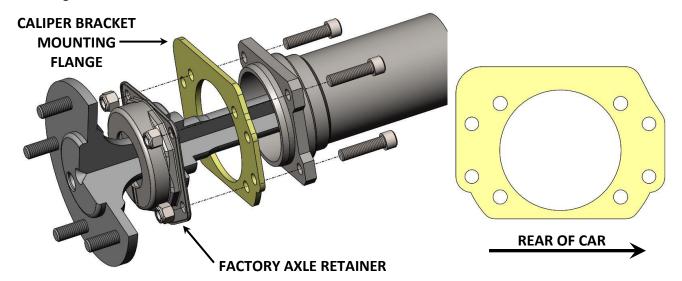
Axle Installation with Caliper Bracket Mounting Flange
